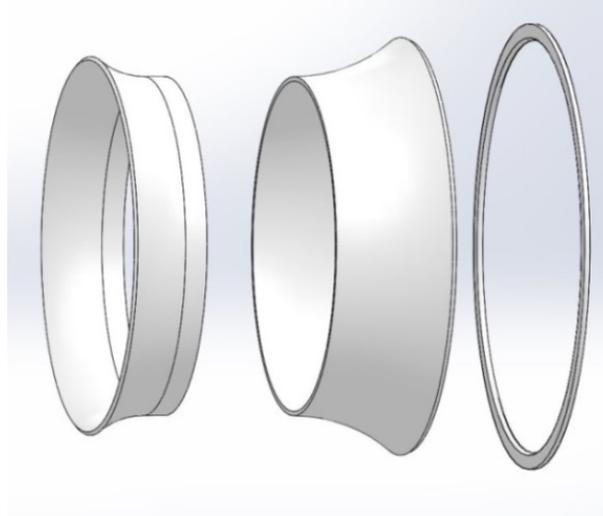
Exploded view of shroud components: diffuser (left), nozzle (center) and flange (right).
